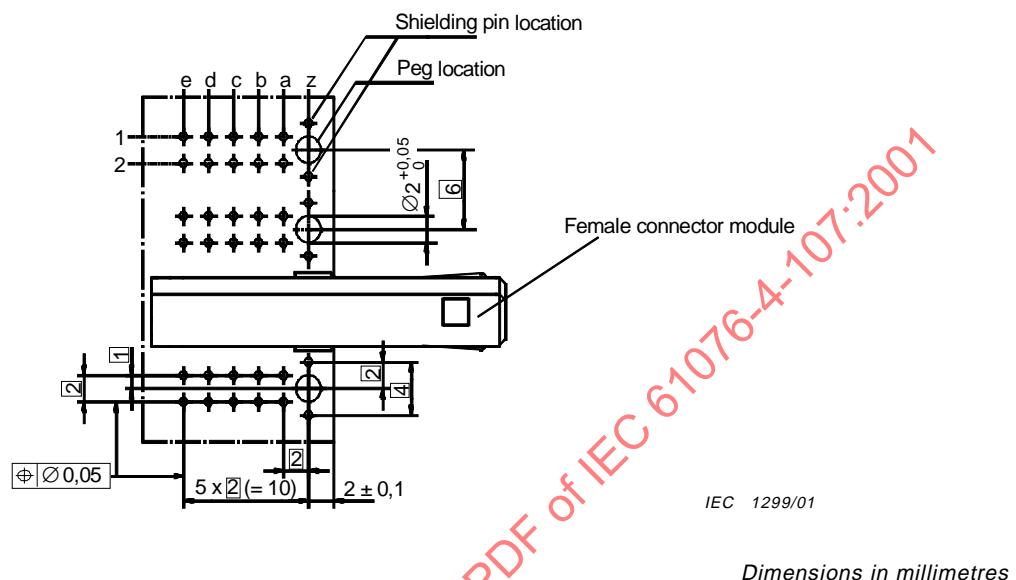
Hole pattern on printed board for fixed board connector with standard contacts
